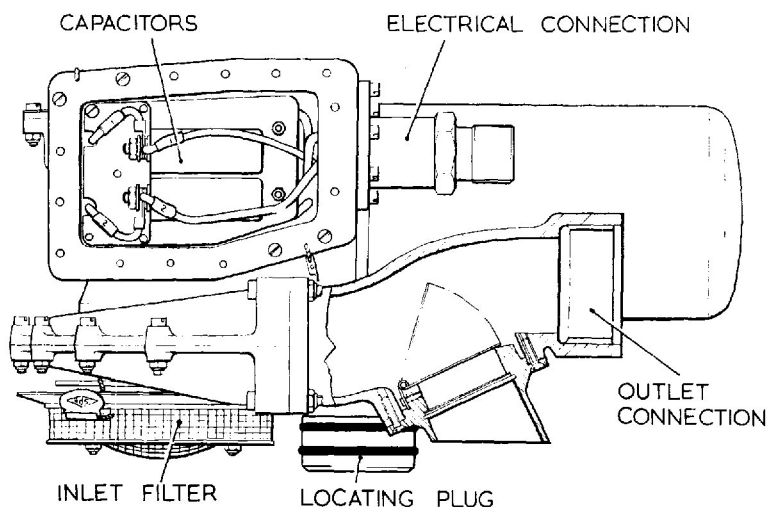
Sectional view of SPE.1202B Mk. 2A showing delivery outlet and by-pass valve assembly
